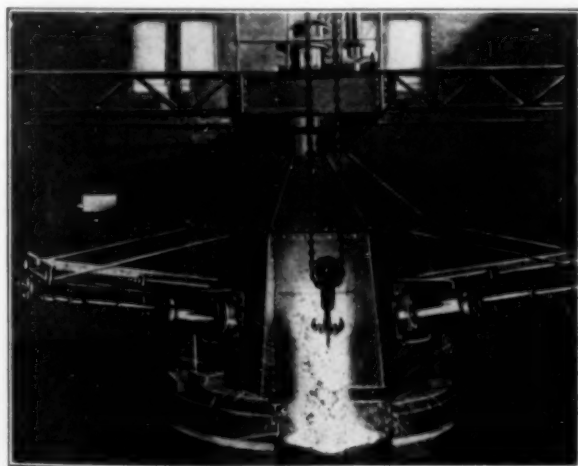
CASTING WITH A ROTARY FURNACE OF 1000 HP.
